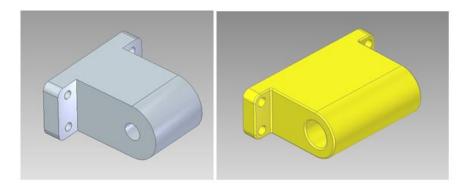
Left, old design of the lower bracket joint. Right, new design of the lower bracket joint.
